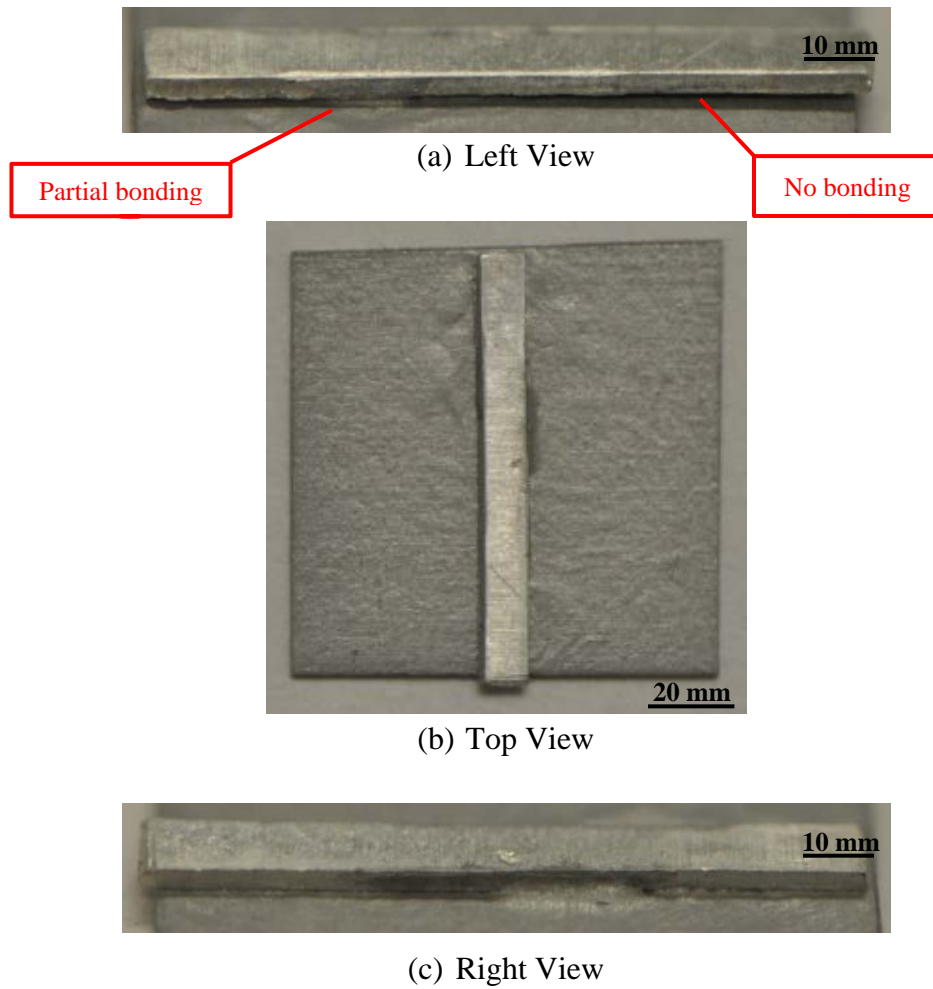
Macroscopic Joint Features of Trillium™ Brazing Sample in Air. Test II.
